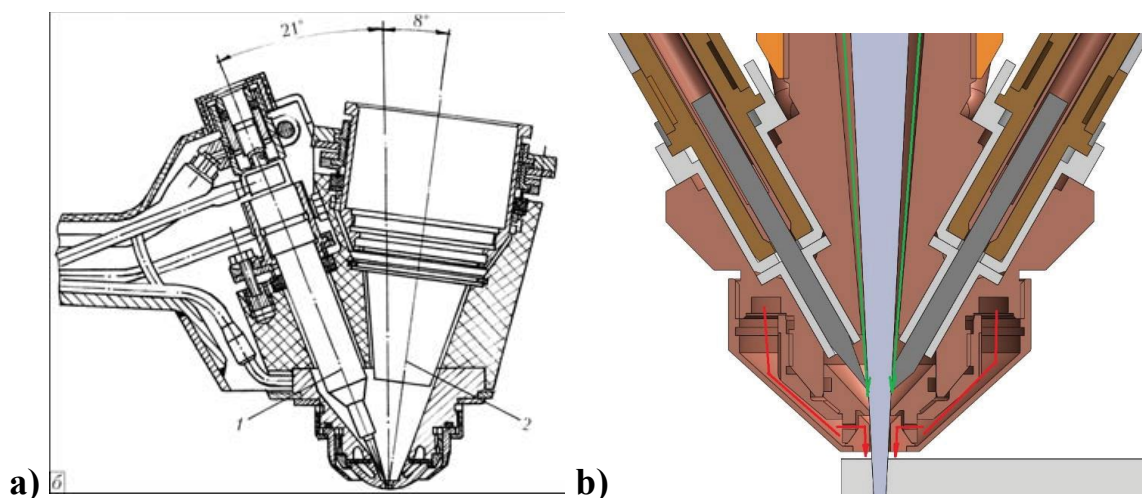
Supply of laser radiation in laser-plasma welding heads: a) – paraxial [1]; b) – coaxial [2].
